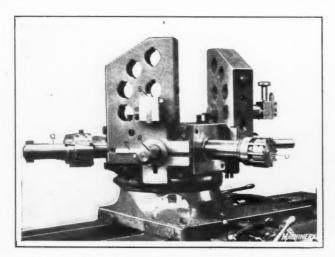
Tooling Equipment provided on the Turret for the First Operation on the Worm Quill
